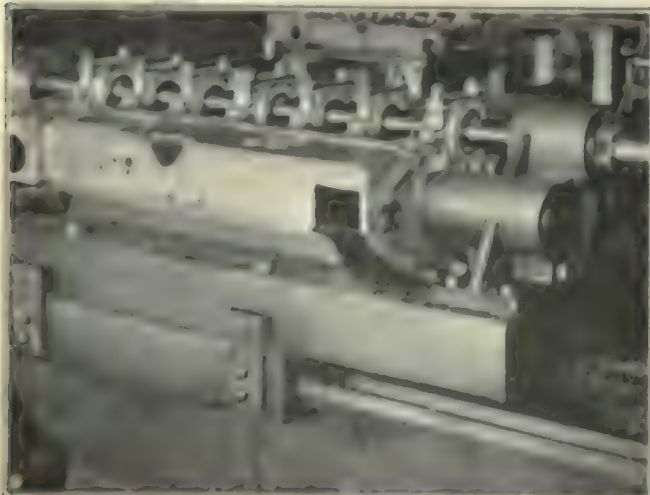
BORING THE BEARING BUSHINGS WITH SINGLE-POINT TOOLS. FIG. 10—REAMING THE CRANKCASE
